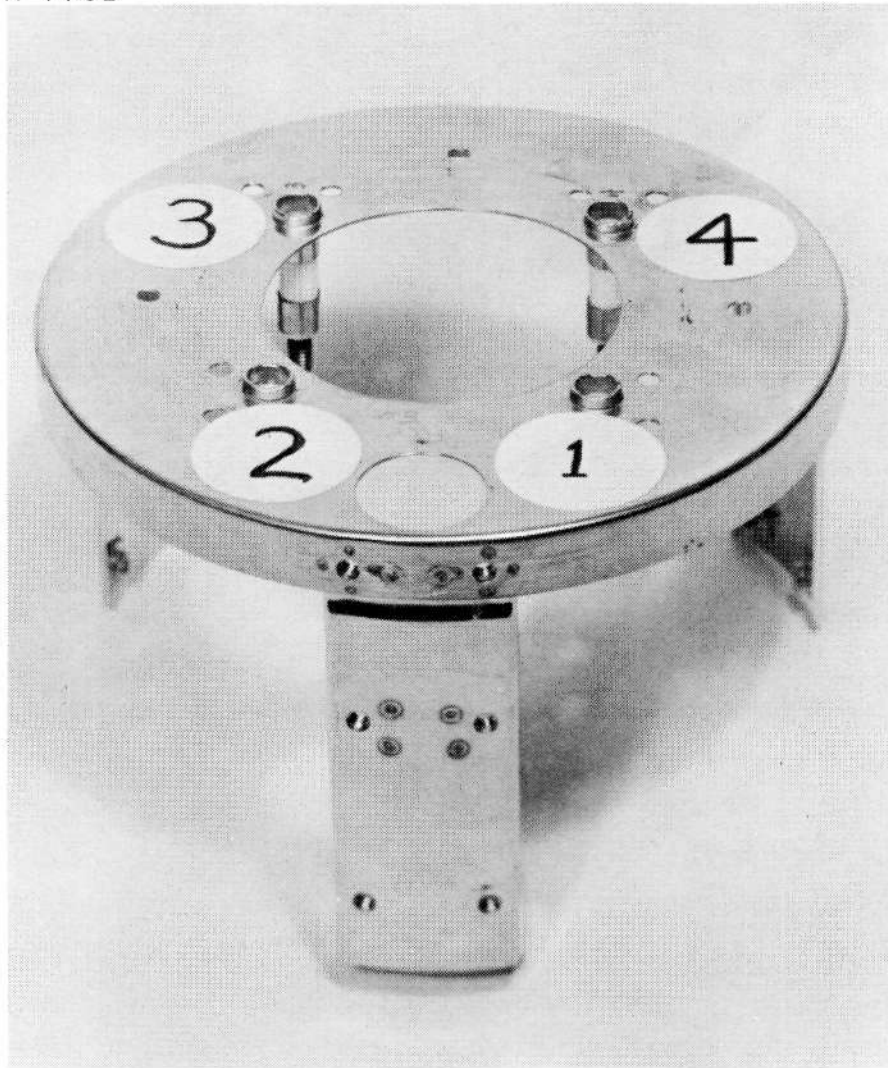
The SIT-5 Thruster Mounting Plate Showing the Location (1 to 4) of Failure.
